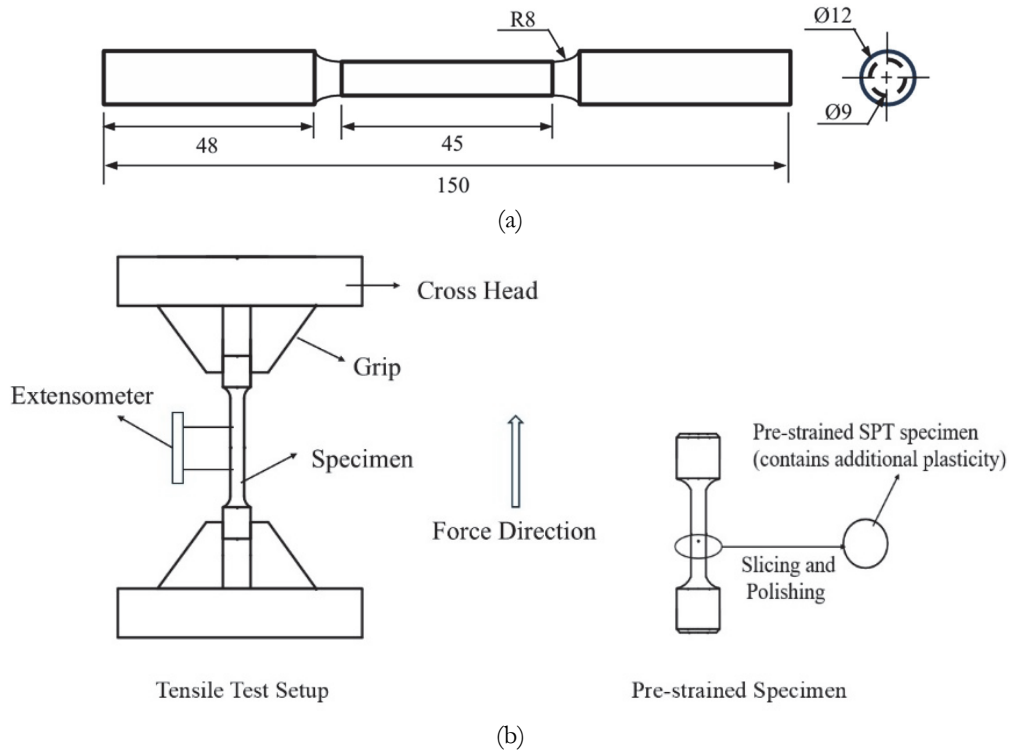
(a) Dimension of uniaxial tensile test specimens (b) Uniaxial tensile and pre-straining test setup.
